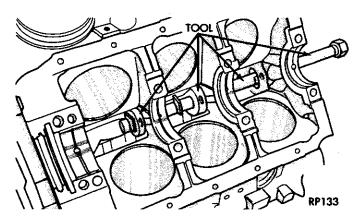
Removal/Installation Camshaft Bearings (Tool C-3132A)
